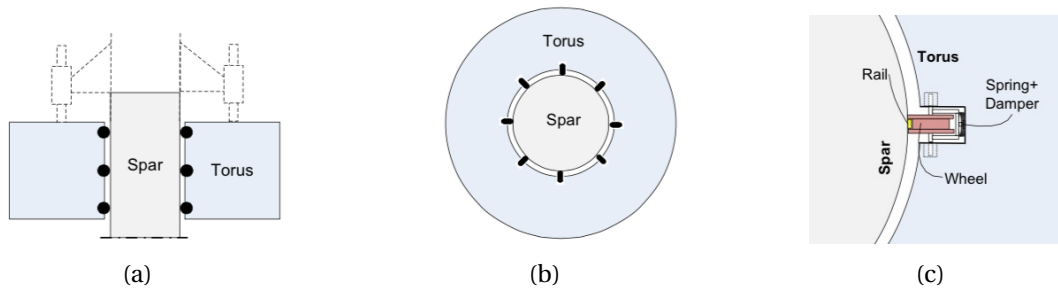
Main bearing system: (a) horizontal view (b) TOP VIEW and (c) WHEEL/CONTACT POINT(from[6])
